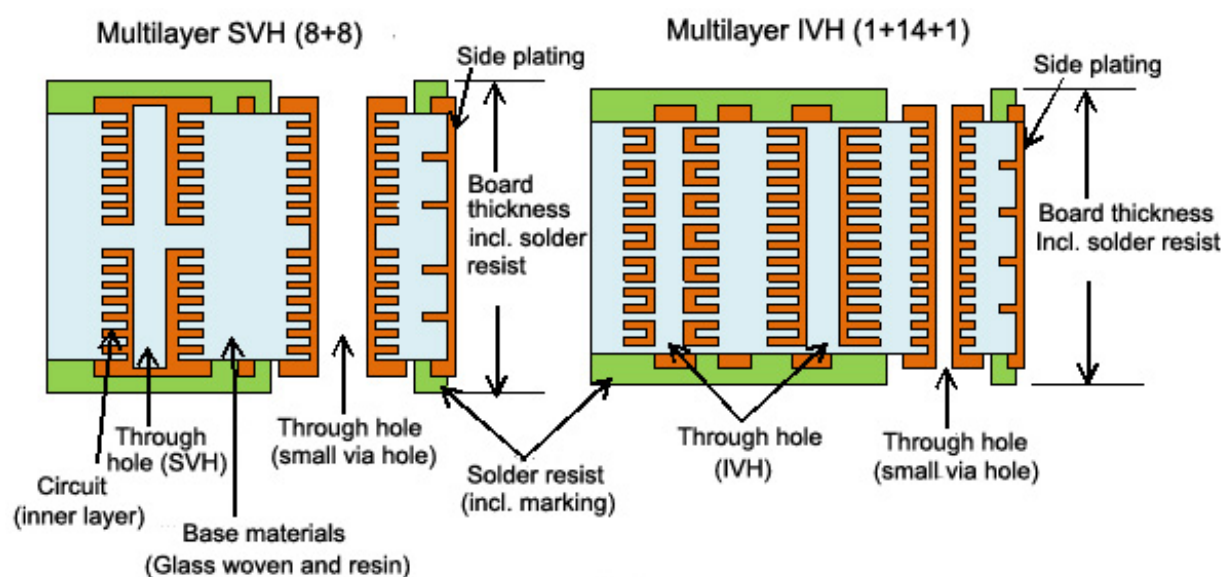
Cross Sectional View of Multilayer SVH/IVH Boards
